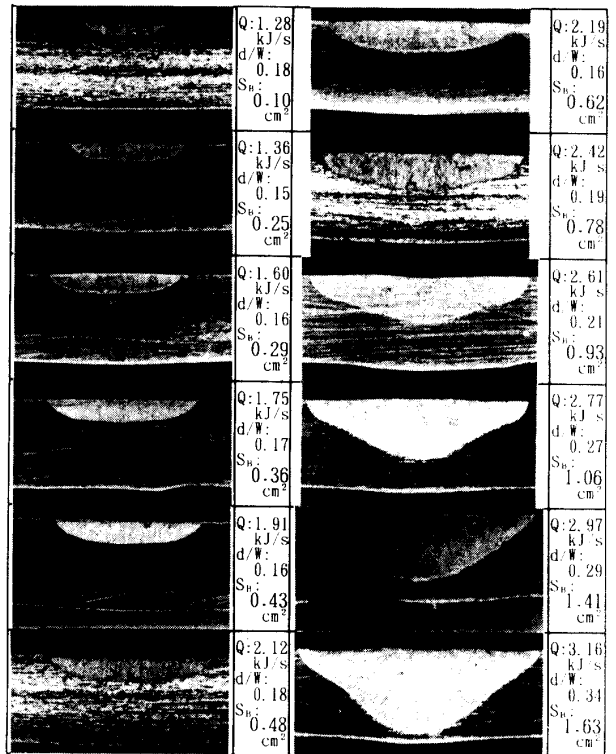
Relation between Heat Input (Q), (d/W) Ratio, Melting Area (S_B) and the Shape of Bead Section of Stainless Steel, welded by TIG Process.
